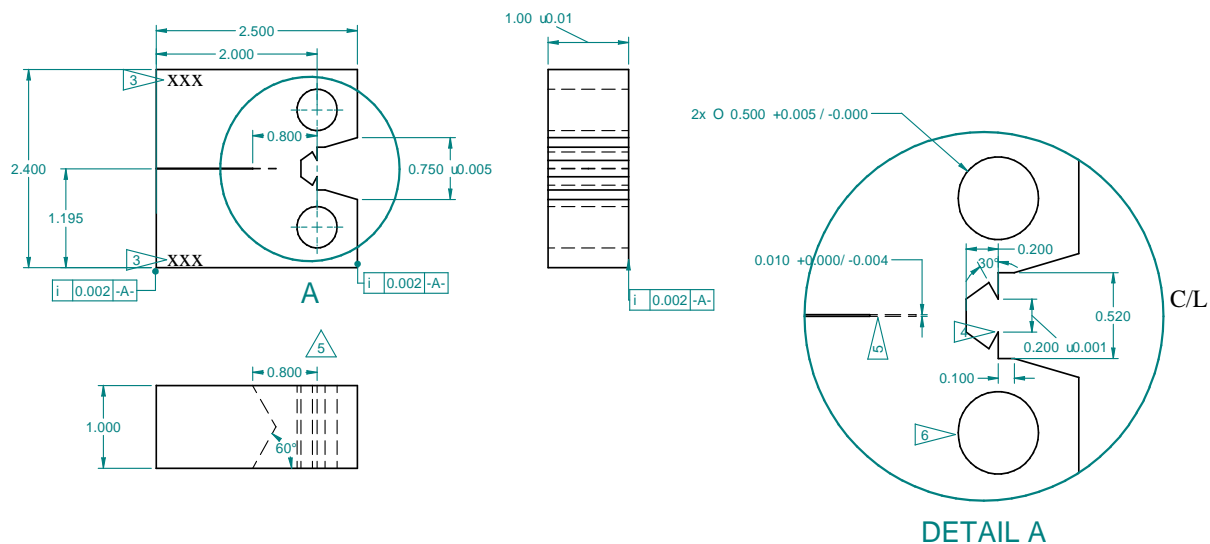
J_{1C} fracture toughness specimen design; L-T and T-L orientations. All dimensions are in inches (20).
